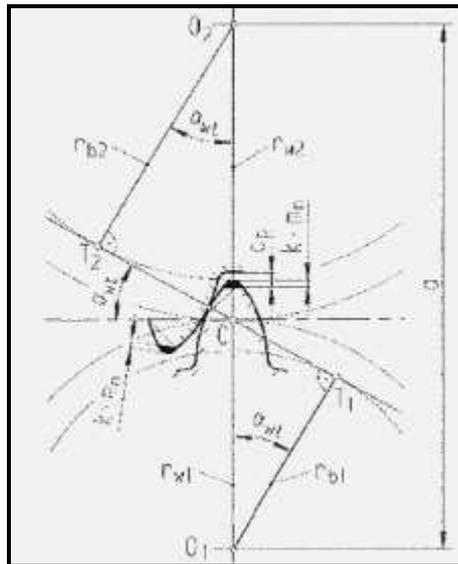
Transverse section of an external gear pair with contacting left handed flanks
